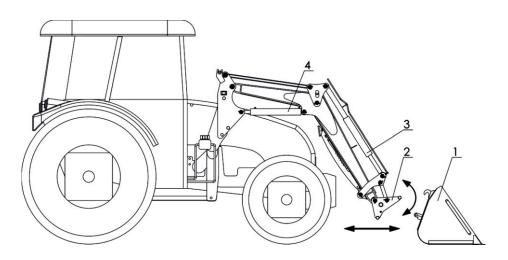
Mechanical-tool installation. 1 - work tool, 2 - coupling frame, 3 - arm cylinder, 4 - jib cylinder
